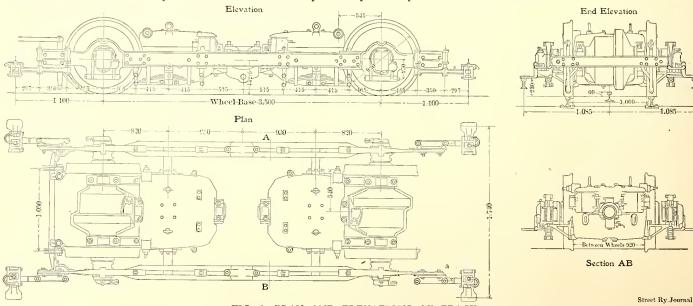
PLAN AND ELEVATIONS OF TRACK
